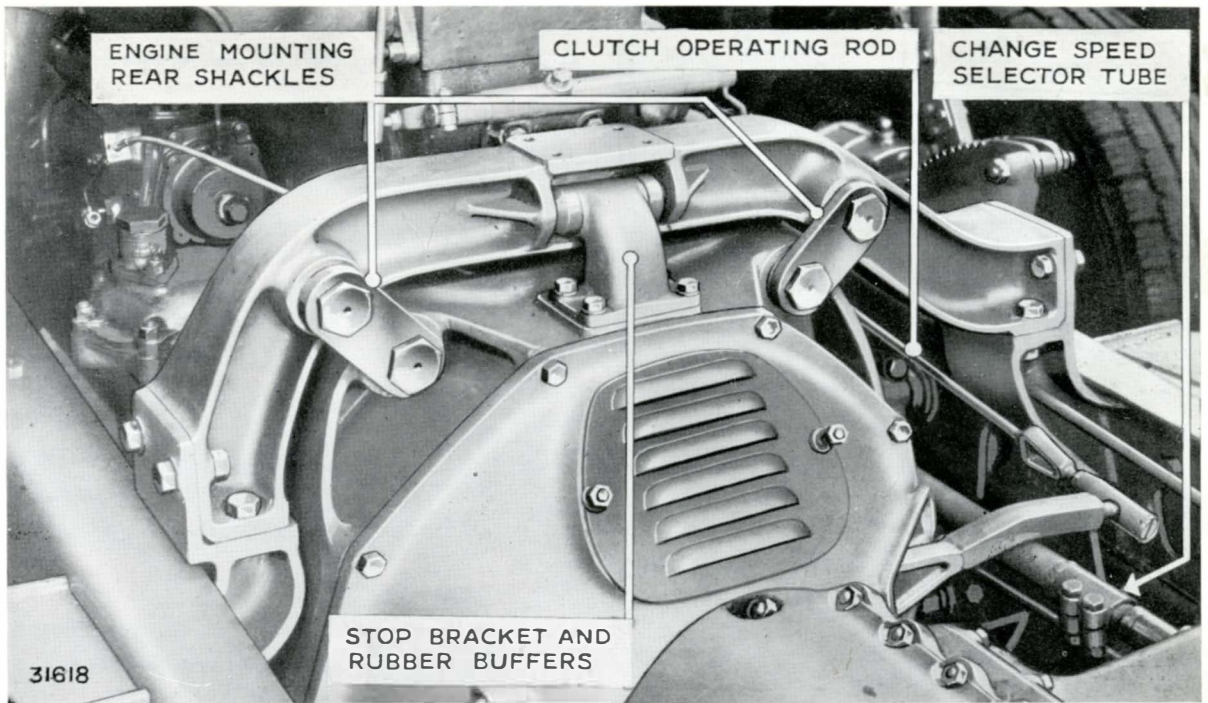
THE CLUTCH HOUSING AND ENGINE REAR MOUNTING ON THE PASSENGER VEHICLE
